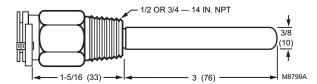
Approximate boiler fitting and bulb dimensions in inches (mm) for L4006C and L6006B.
